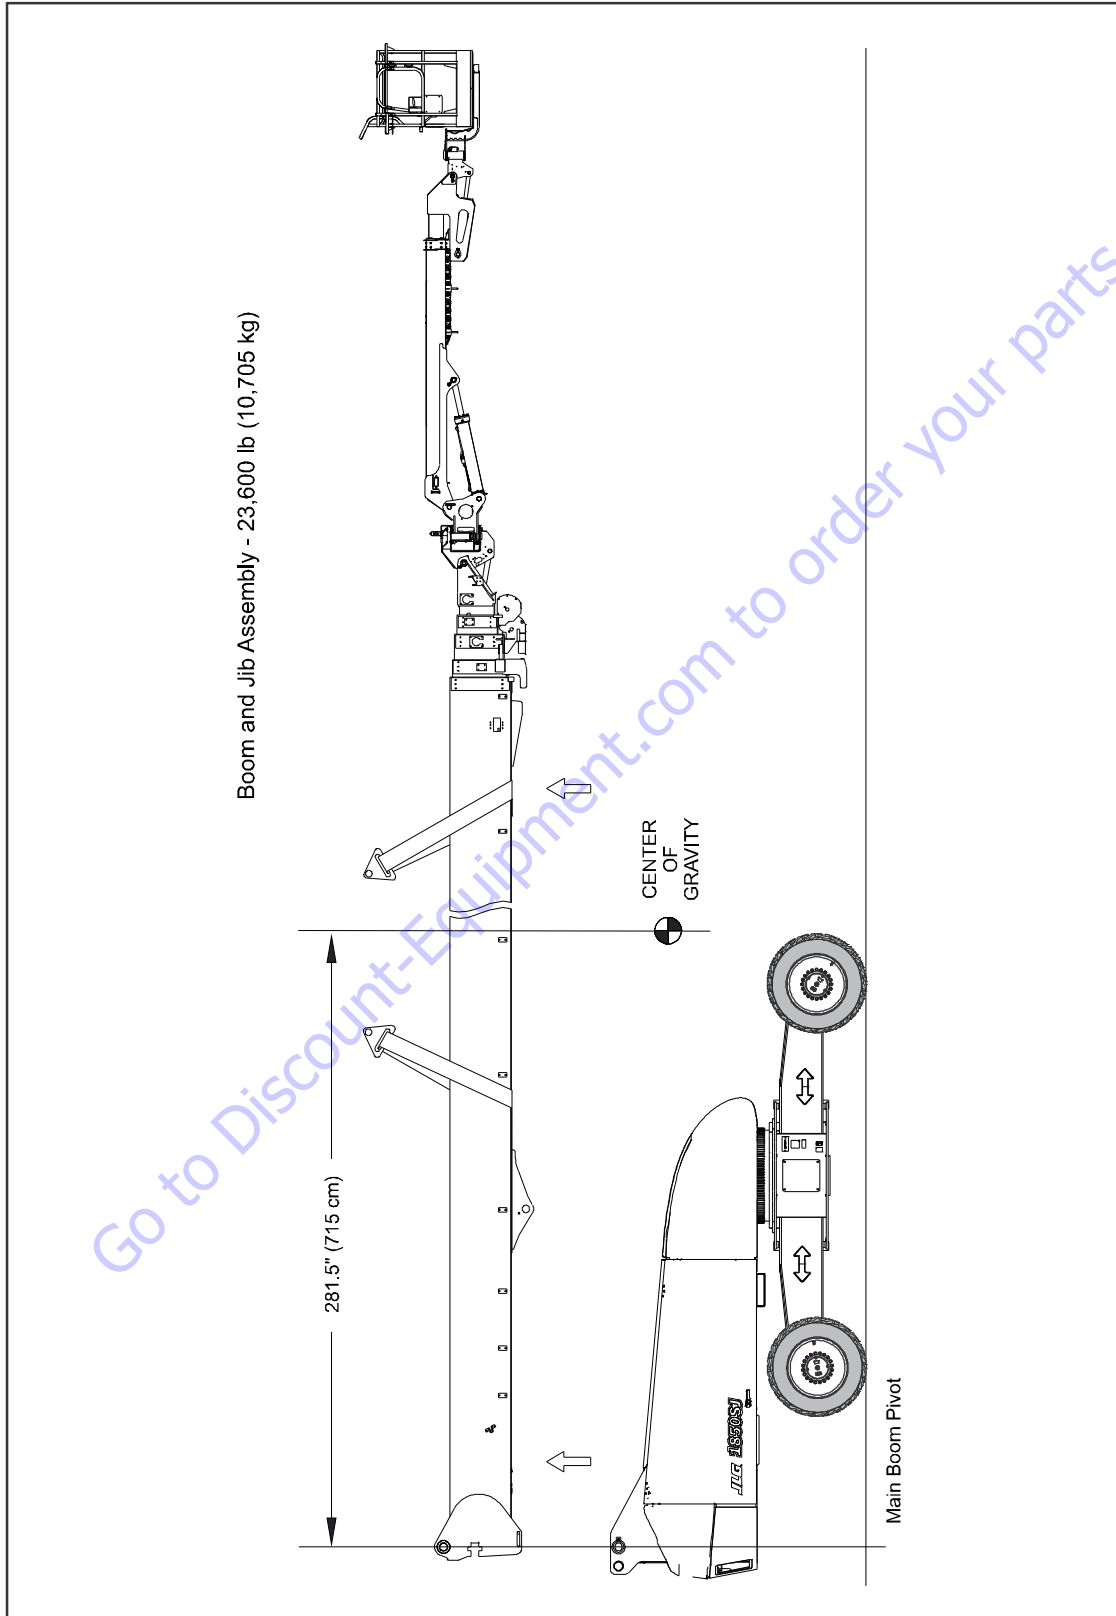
Swing Bearing Removal - Sheet 2 of 4
